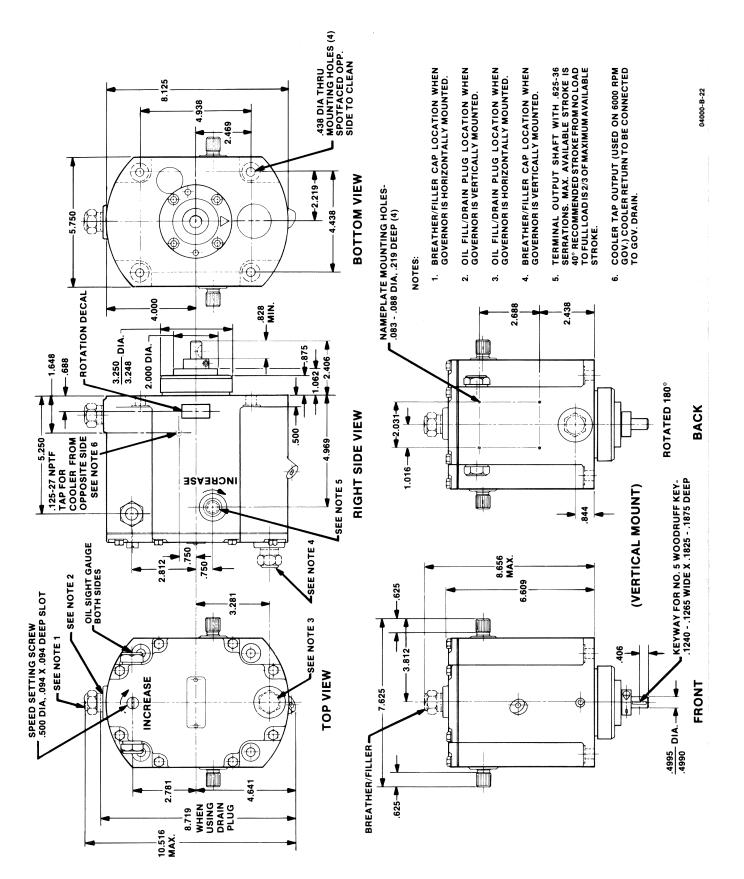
TG-13/TG-17 Outline Drawing Screw Speed Setting. Cast Iron Case. Do Not Use For Construction
